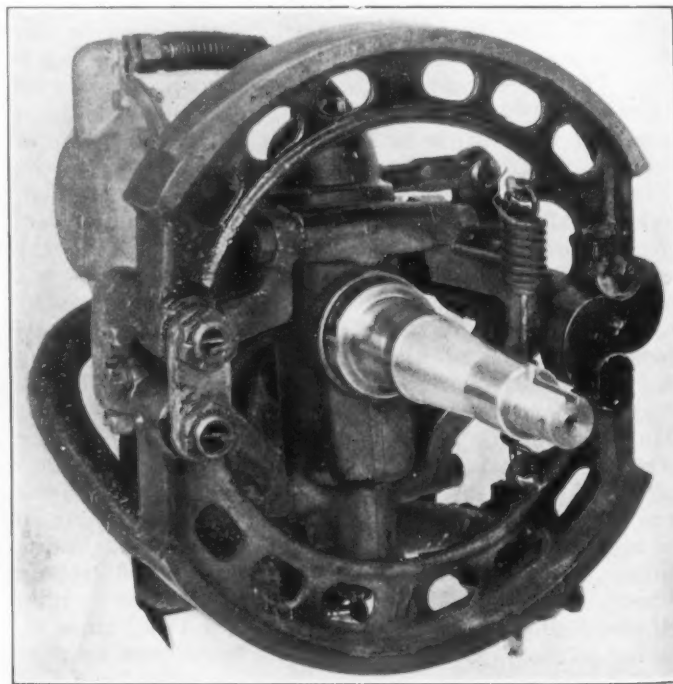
VIEW OF AIR-OPERATED FRONT-WHEEL BRAKE-SHOE ASSEMBLY
